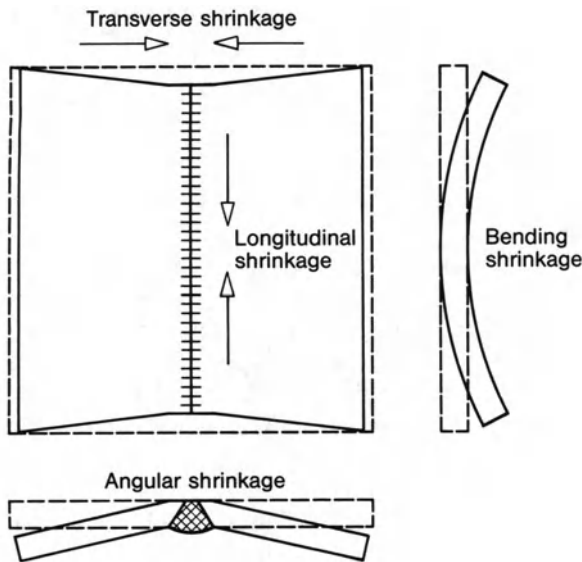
Longitudinal and transverse shrinkage, angular and bending shrinkage of rectangular plate with single-side welded centric jointing seam
